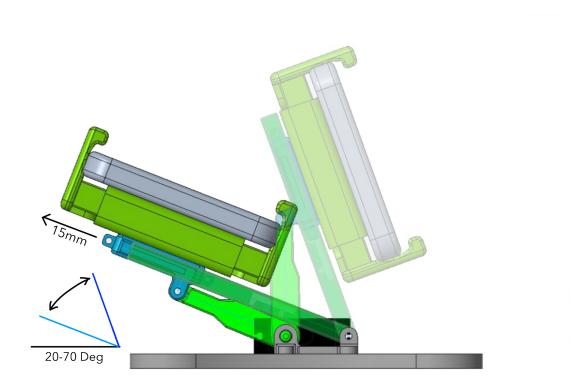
The Inverted Slider Crank Mechanism Demonstration
